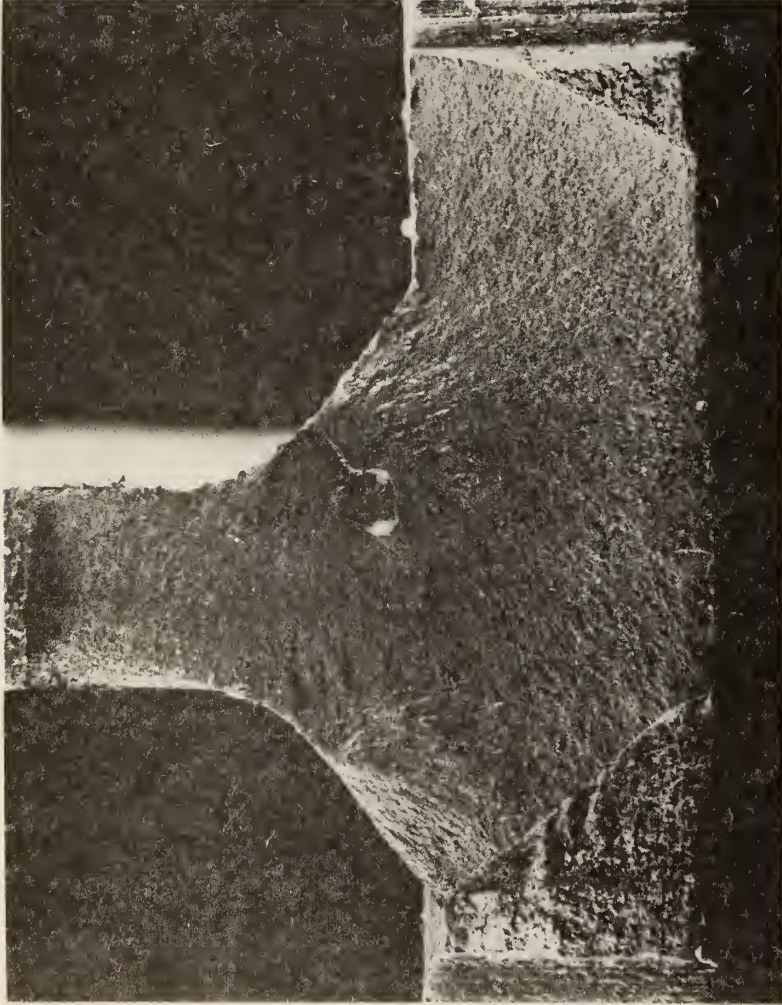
Fatigue crack originating from gas pocket in fillet weld of welded beam.
